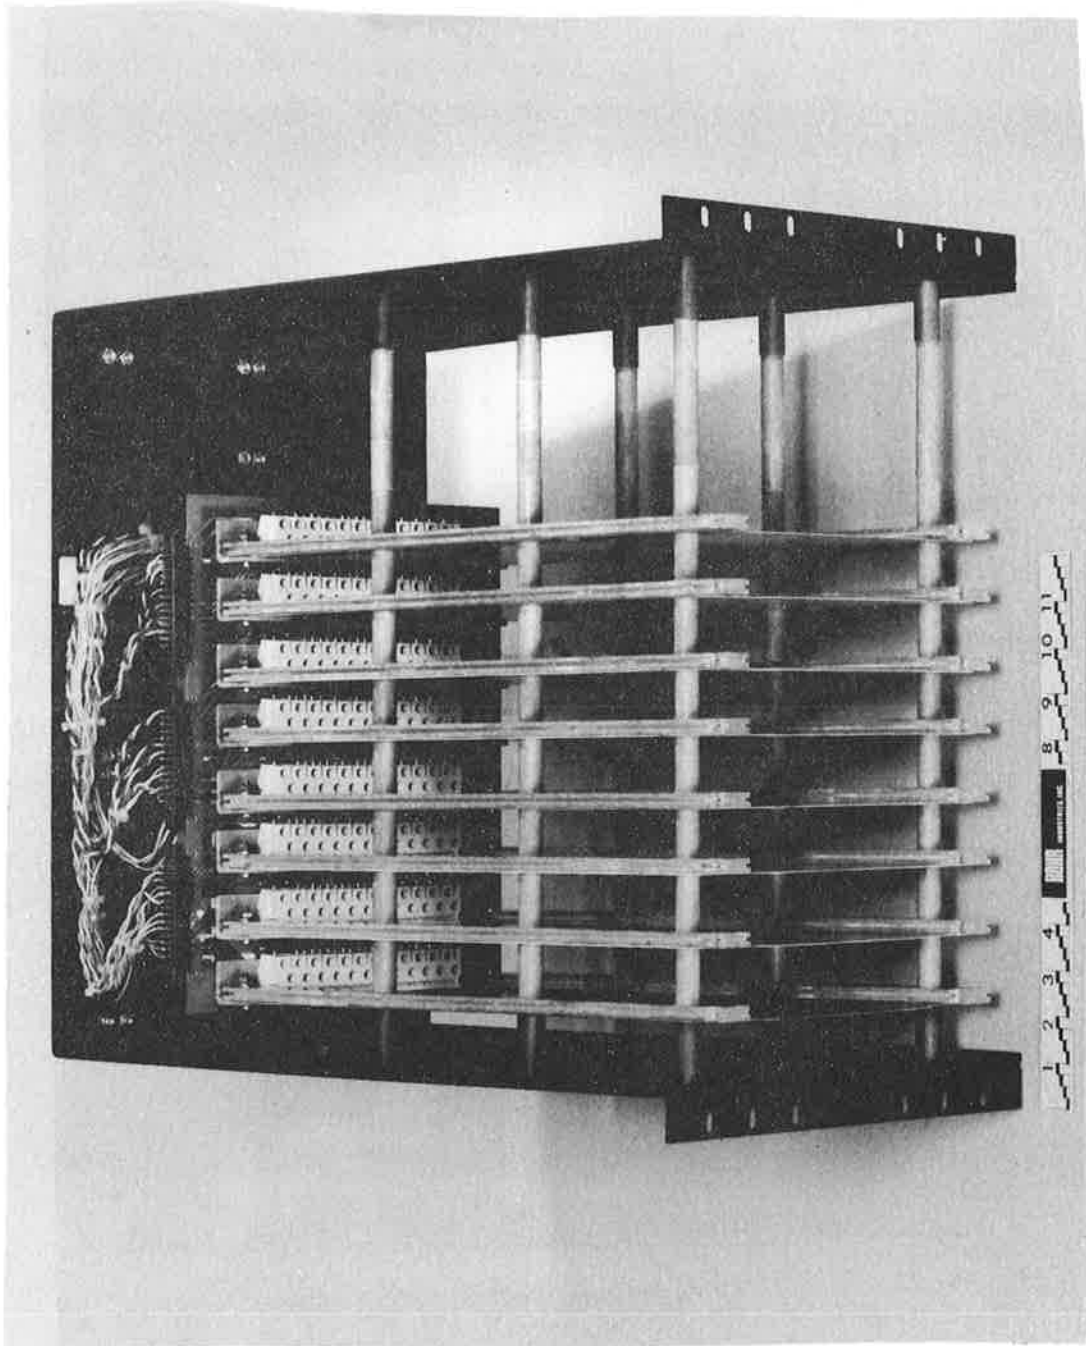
INSIDE OF DRIVER POWER SUPPLY ASSEMBLY NO. 1
